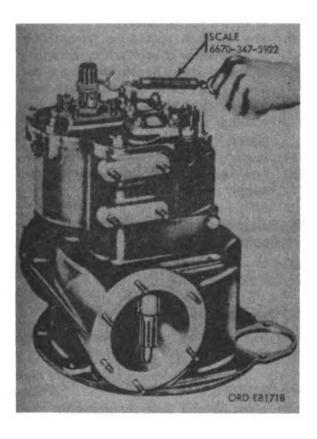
Checking preload of drive pinion using scale—6670-317-5922.
